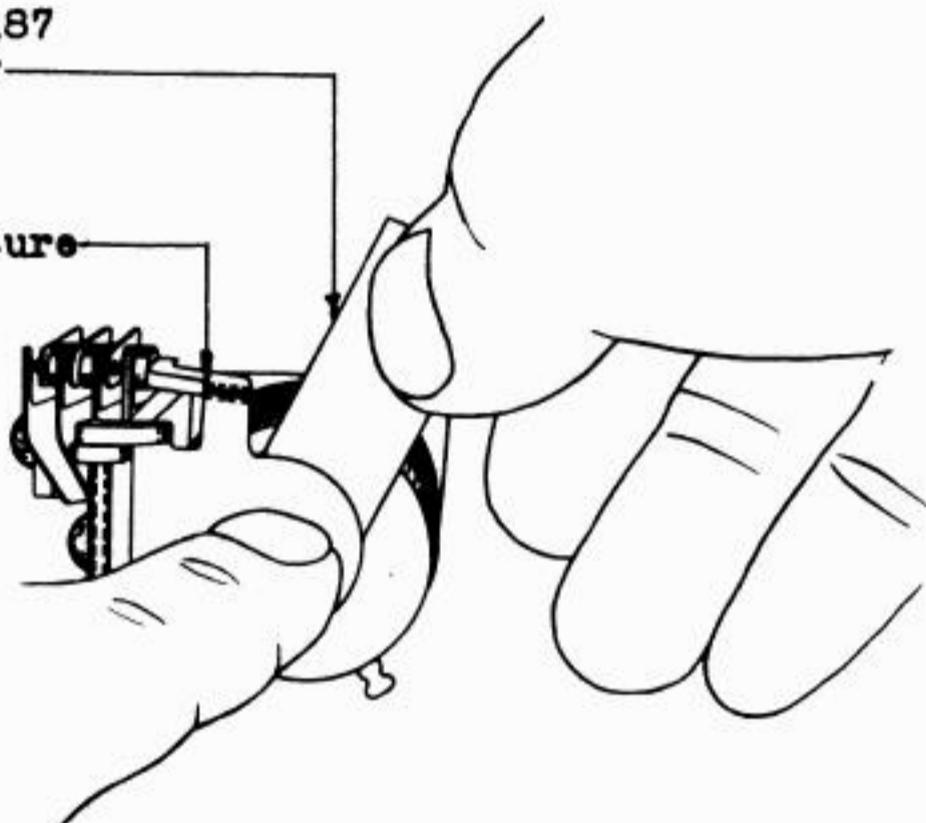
Method of Cleaning Armature and Core of Step-by-Step Relays
